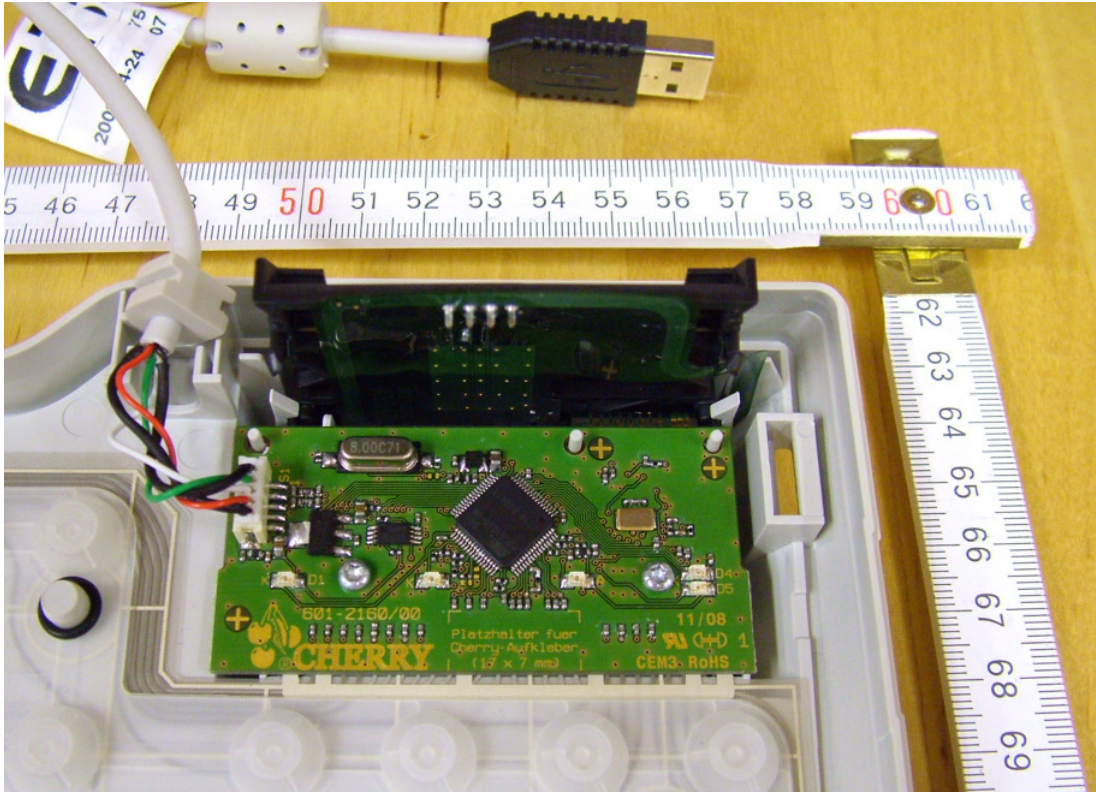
Zoom to corner / Keyboard open with Matrix and PCB's (front side)
